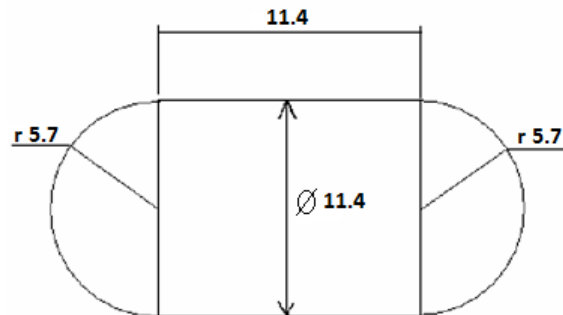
Bird Impactor Dimensions (all dimension is given by cm) [15]
